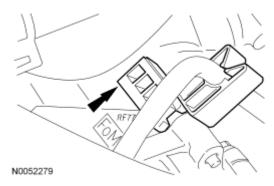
Identifying Fuel Hose Routing Clip From Transaxle Stud Courtesy of FORD MOTOR CO.
